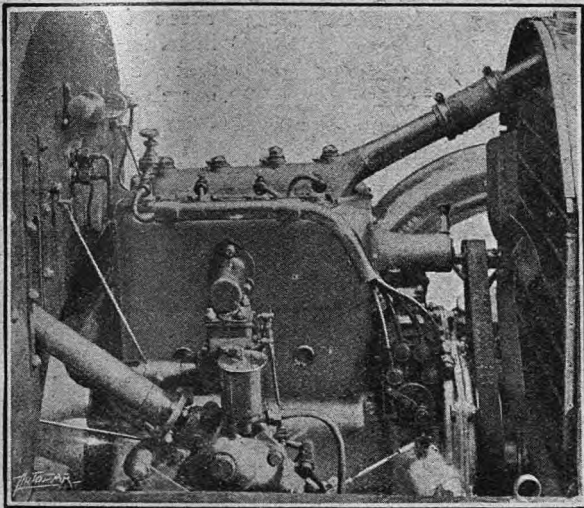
Off side view of the 12-14 h.p. F.N. engine showing the accessible position of the magneto and carburetter.
